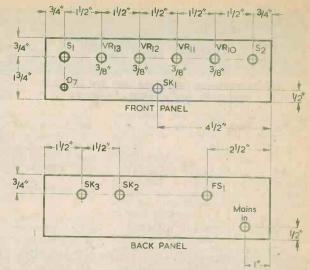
How the front and back panels are drilled. Hole diameters are not shown where these depend on the particular components employed
